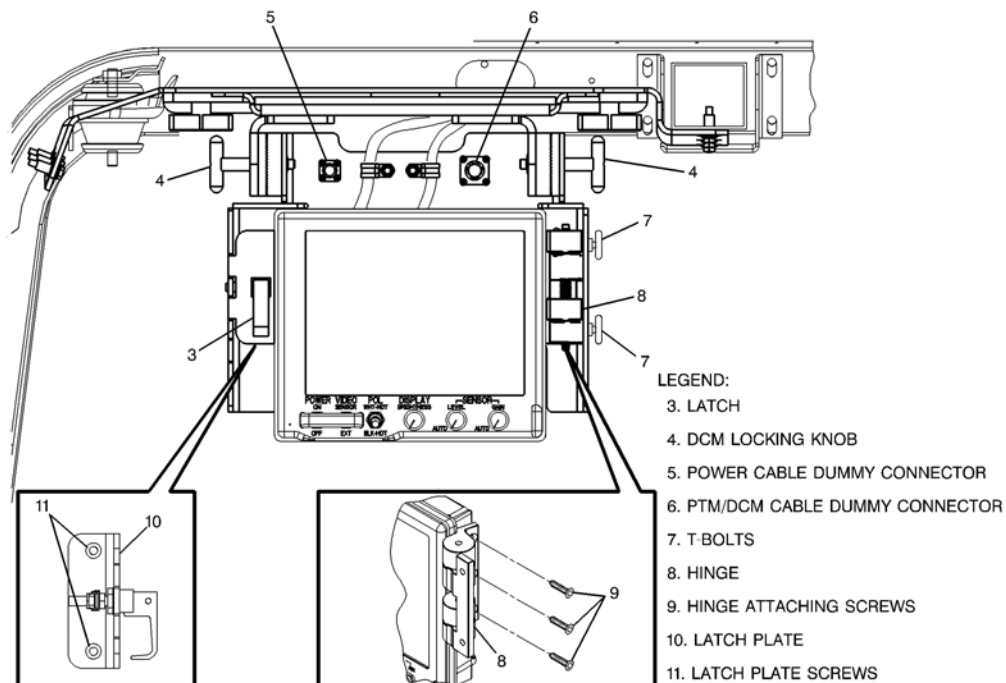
DCM Installation for the TOW HMMWV (Front View, Sheet 2 of 3)
